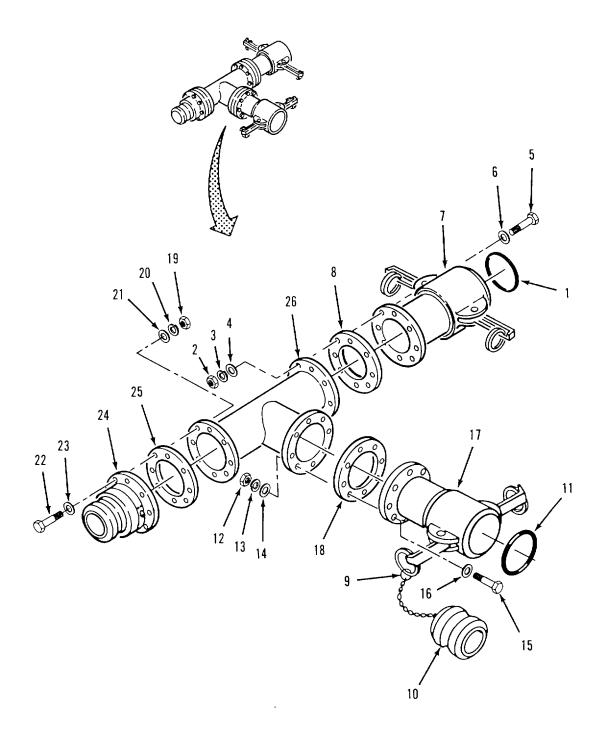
Tee Assembly (9112-Y3) Disassembly
